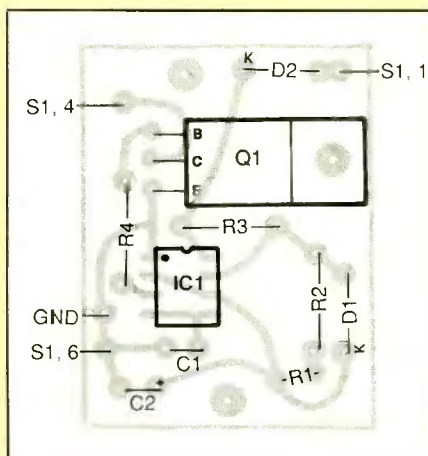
Wiring guide for pc board. Use this as a rough guide to component layout if you use perforated-board construction.
